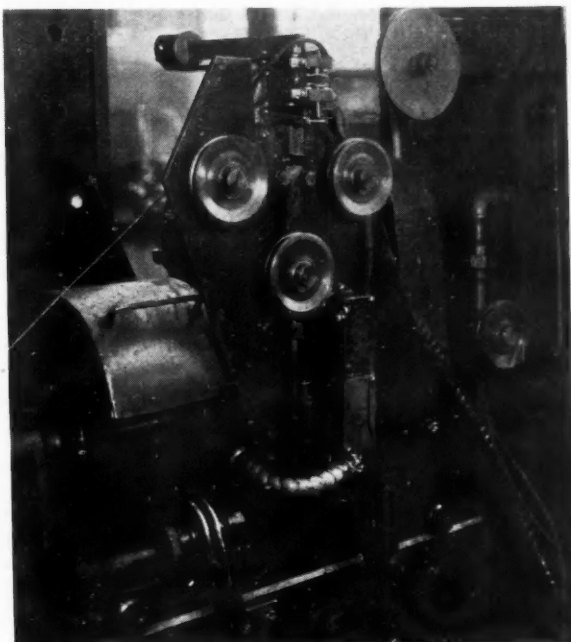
The rider pulley and reactor side of the wire-drawing machine which is equipped with Thyatron control of the reeling tension
